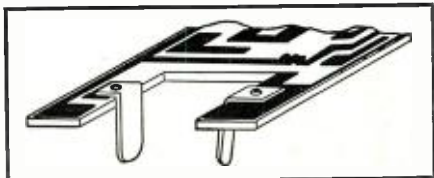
Details for making the battery clips to be mounted on circuit board.
